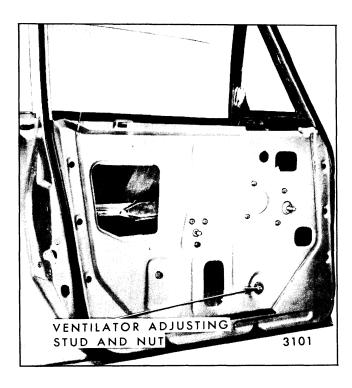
Front Door Window Removal and Adjustment - "X-69" Styles with Optional Ventilator
